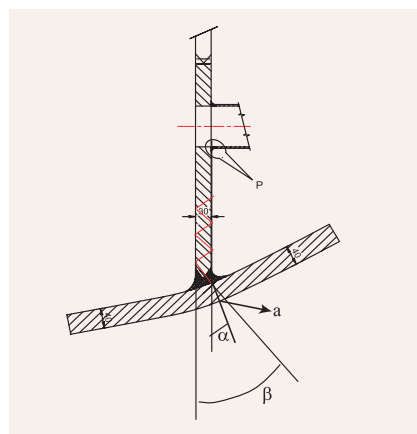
Cross-sectional view of the core support structure showing the support shell weld
